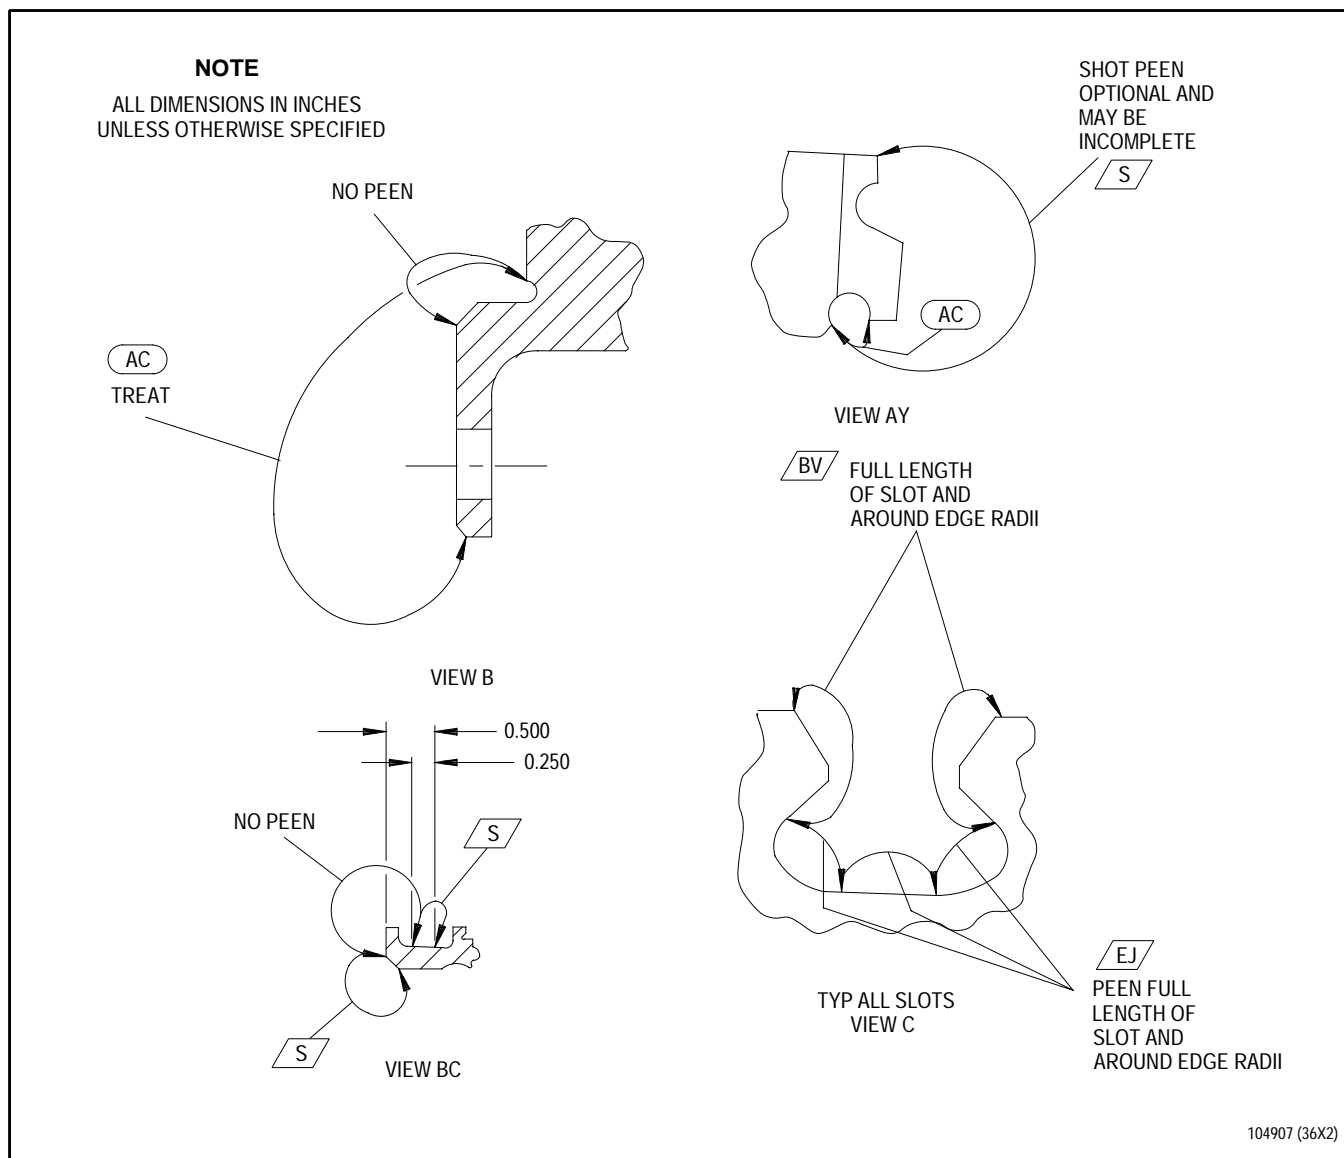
Front Compressor Drum Rotor Disk Assembly - Shotpeening (Sheet 2 of 2)
